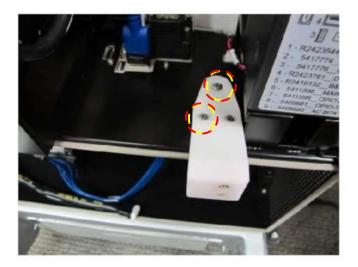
Removing the RS Cable Assembly - Rear Part
